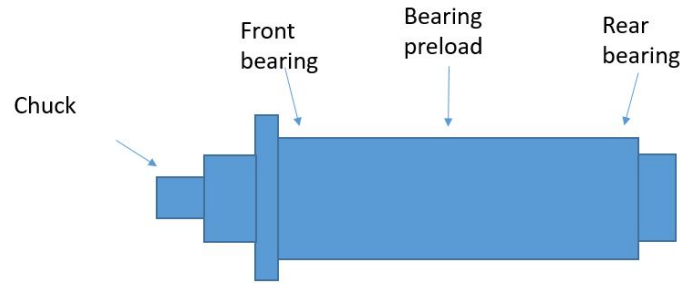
Simplification of the placement of the bearings on the spindle of the machine.
